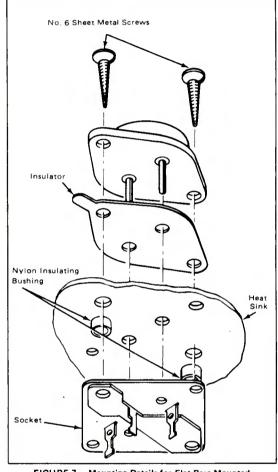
Mounting Details for Flat-Base Mounted Semiconductors (TO-3 Shown).
